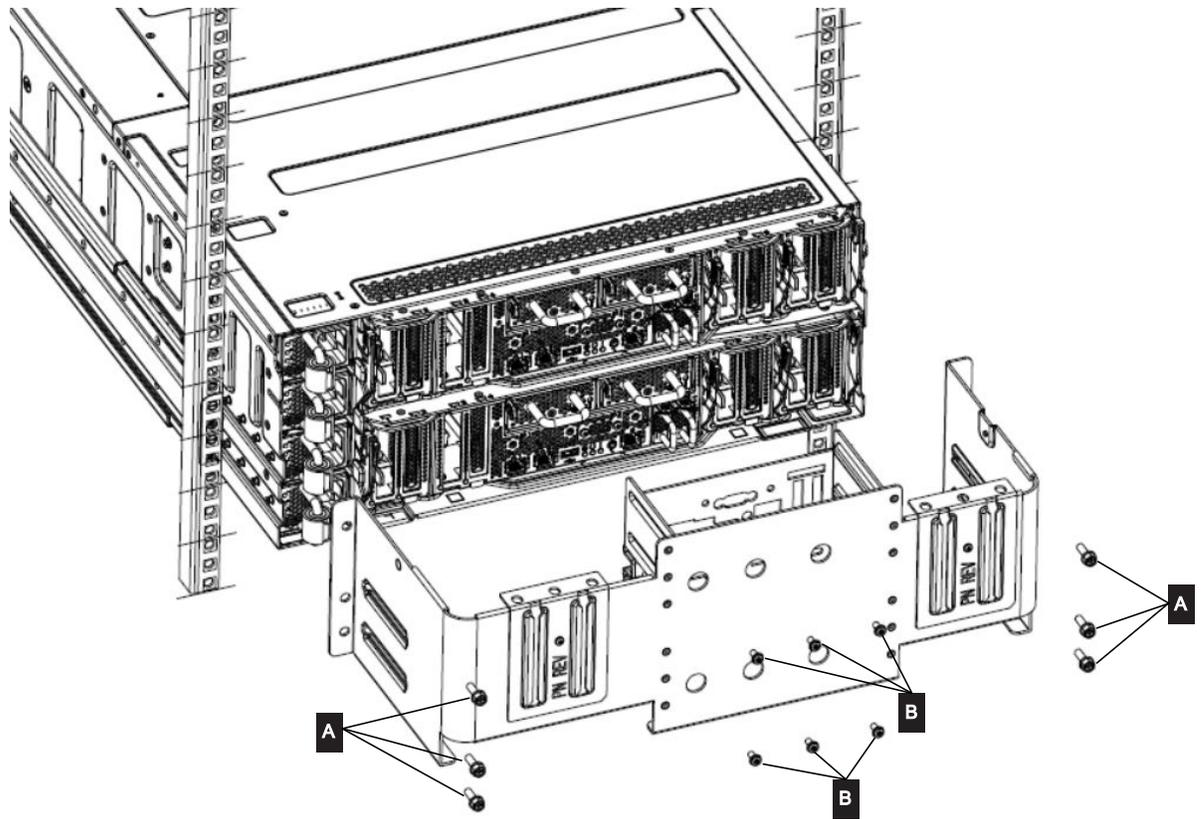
Removing the shipping bracket from the back of a control enclosure.
